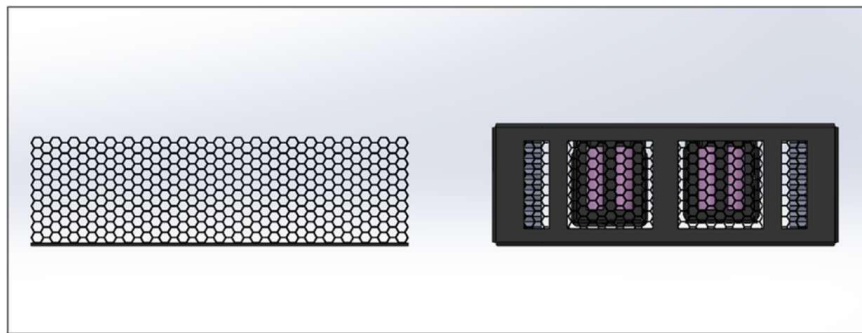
Aluminium Honeycomb CAD Model Comparison
